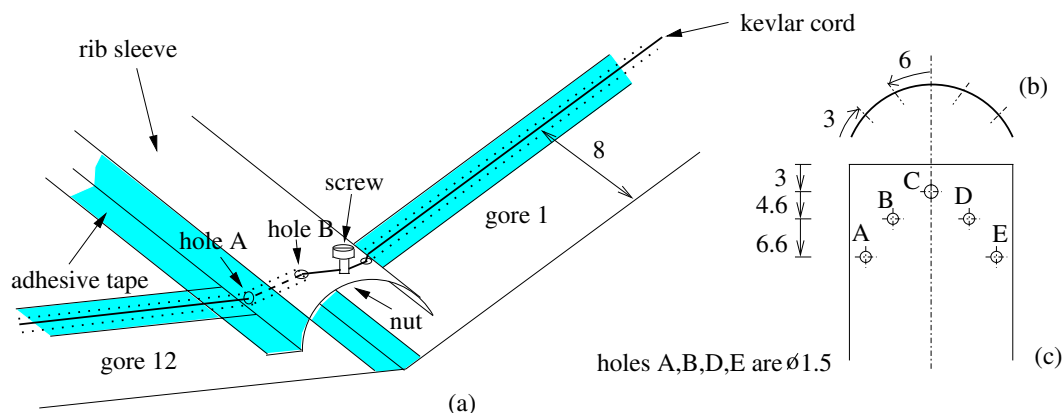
Rib end termination; (a) perspective view; (b) end view and (c) top view of rib (all dimensions in mm).
